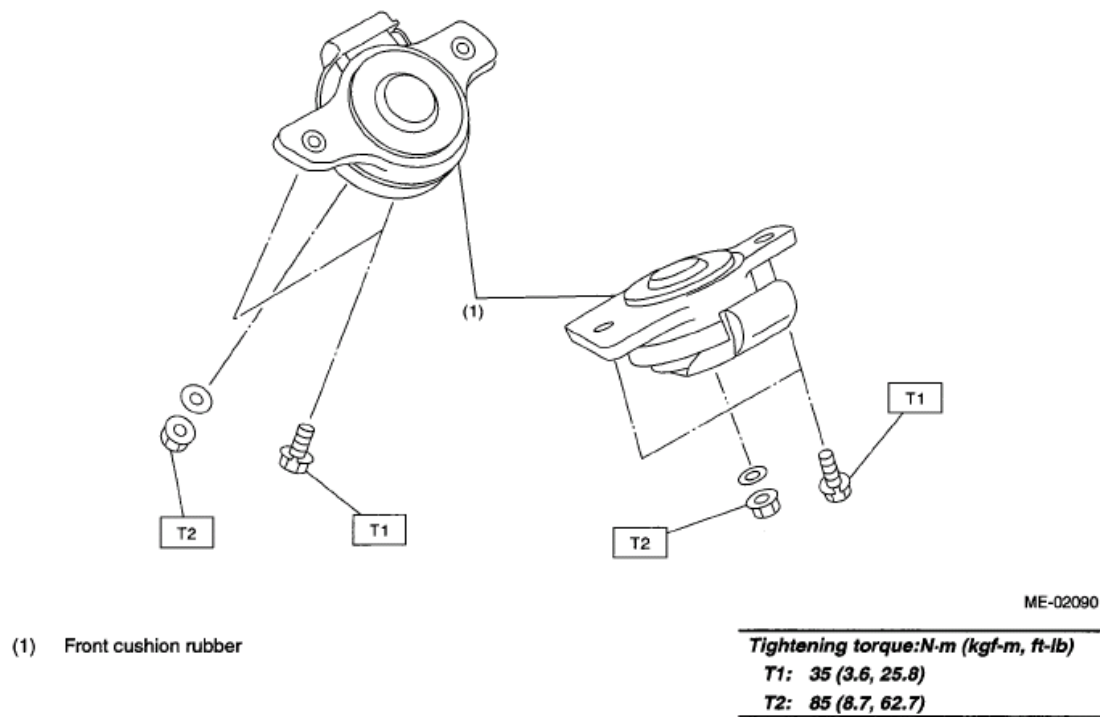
Identifying Engine Mounting Components With Torque Specification
